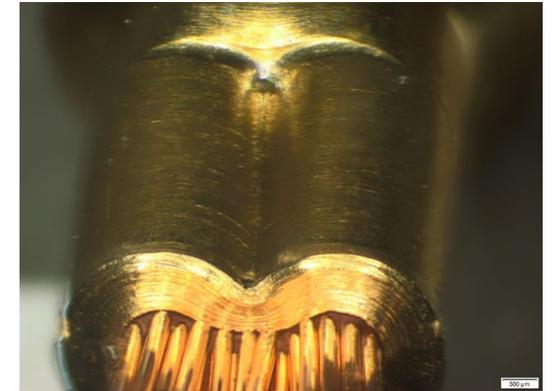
Heavily crimped component made of eZeecrimp without any visible cracking
